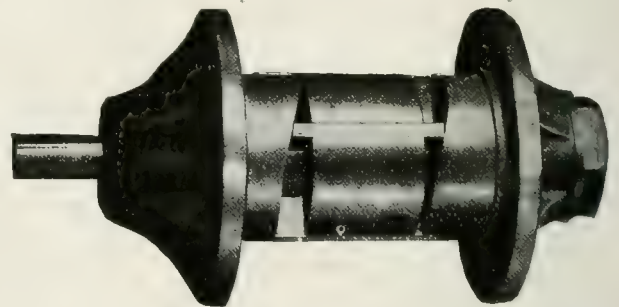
Rotor and End Pieces of Pittler Rotary Pump.
